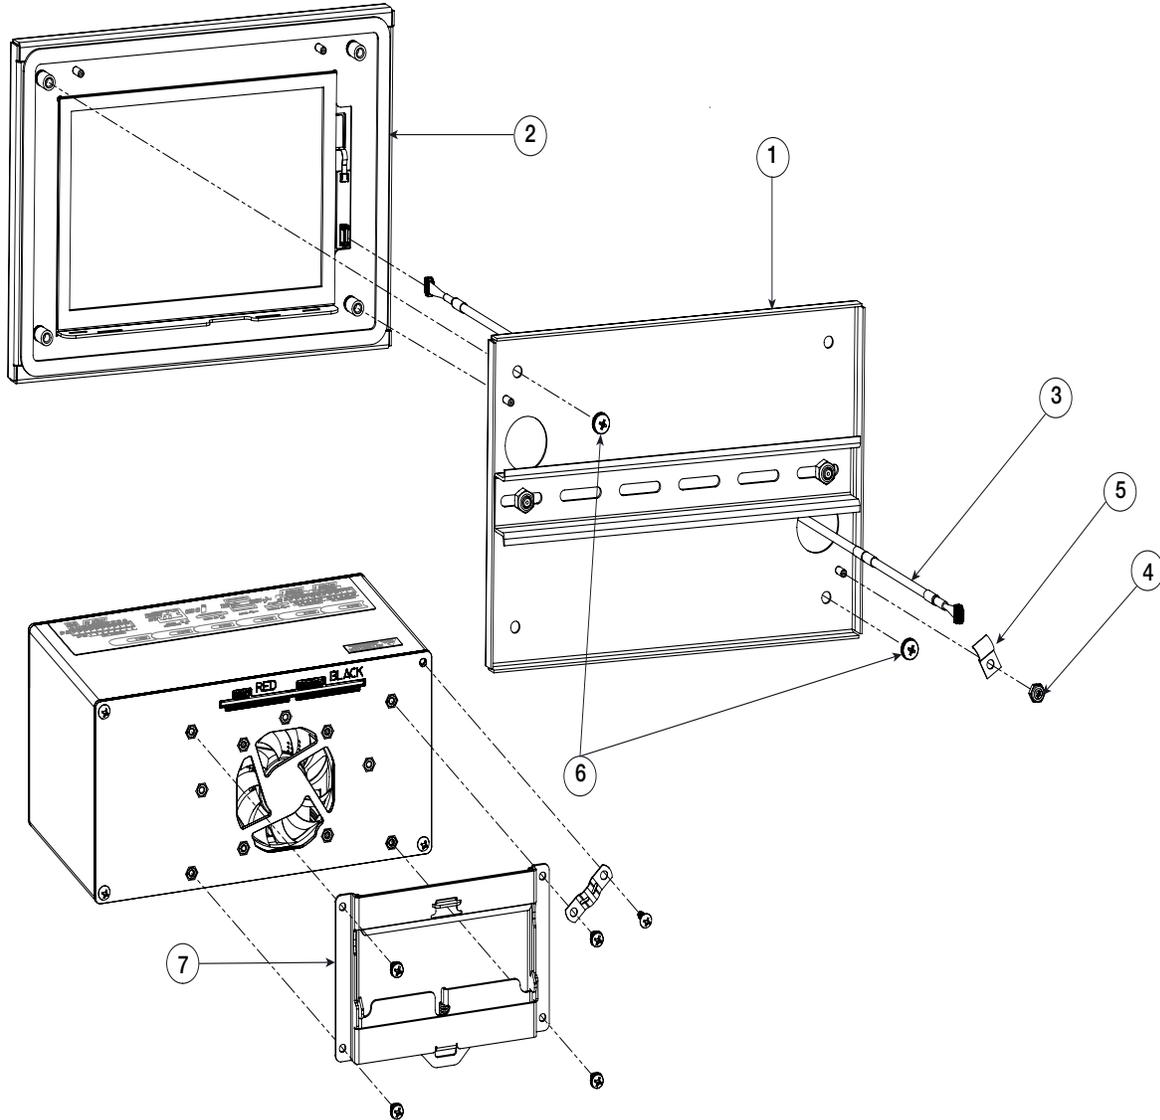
Replacement Parts Drawing - 7 Inch Touch Only Panel Enclosure
